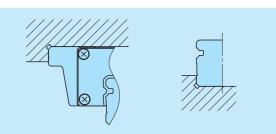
Relieved fillet at the corner of the mating reference mounting surfaces
